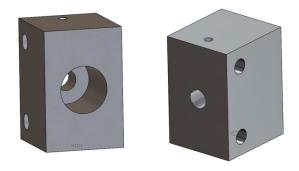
A rendering of the knuckle block that the axle assembly is bolted into.
